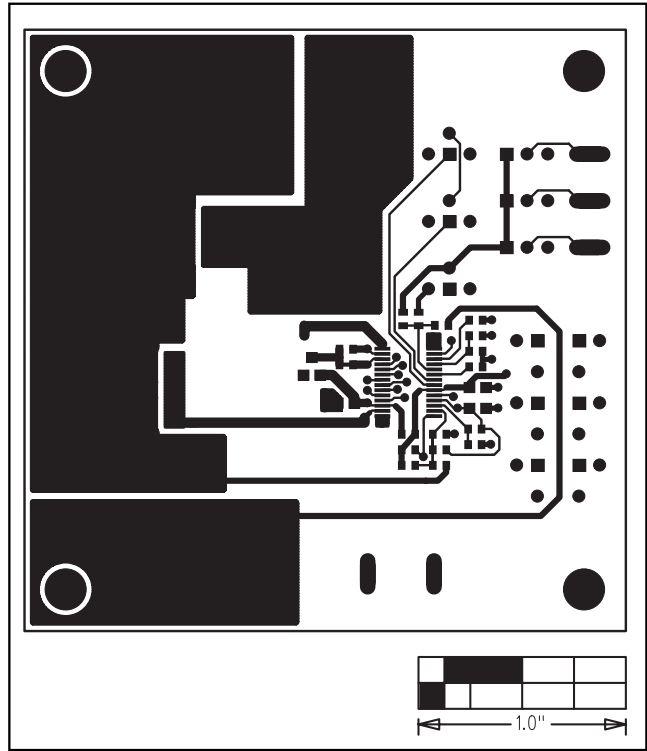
MAX8720 EV Kit PC Board Layout—Solder Side
